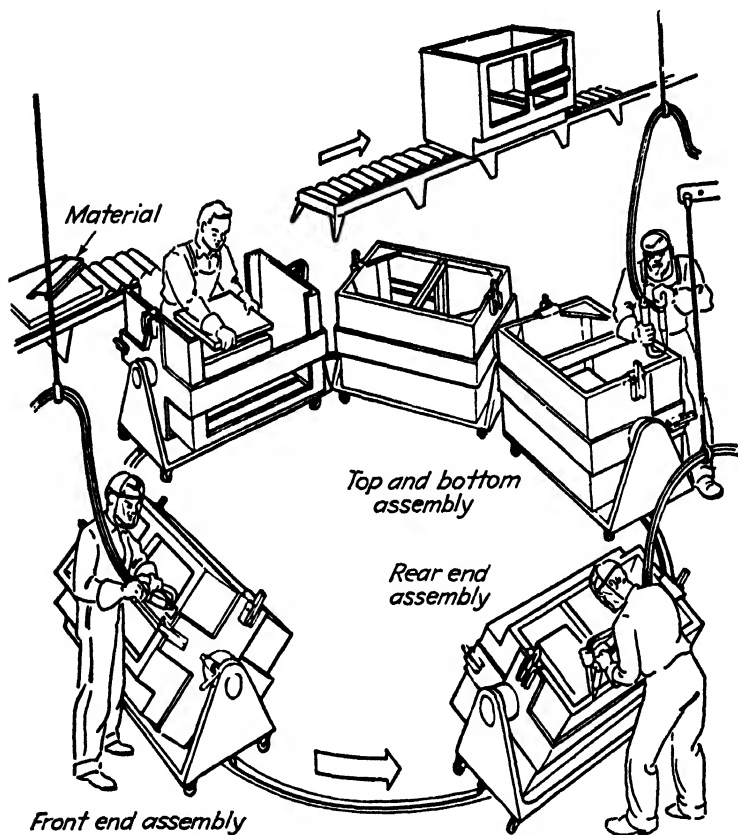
Trunnion-type assembly fixtures and standard gun welders allow rapid work on a circular track.
